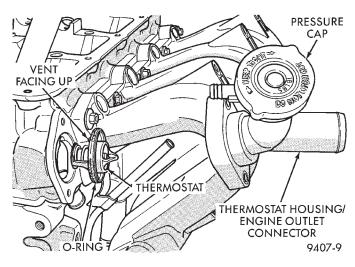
Thermostat/Engine Outlet Connector—2.0L Engine
